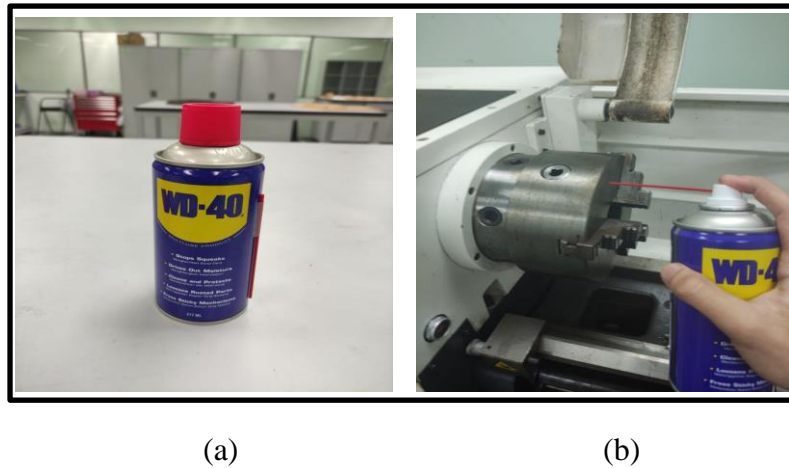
WD-40 Rust Remover Soak (a) and Rust Removal Process (b)
